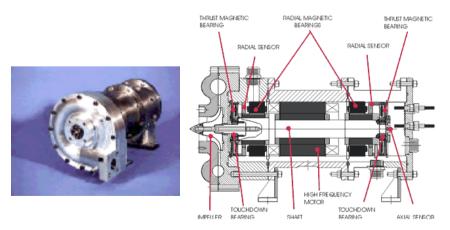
Turbo refrigerant compressor of SKT, Sweden
